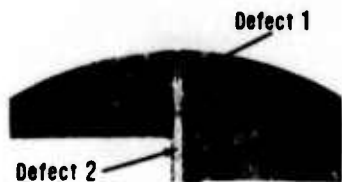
19 -Photographs of vacuum electron Beam weld radiographs
